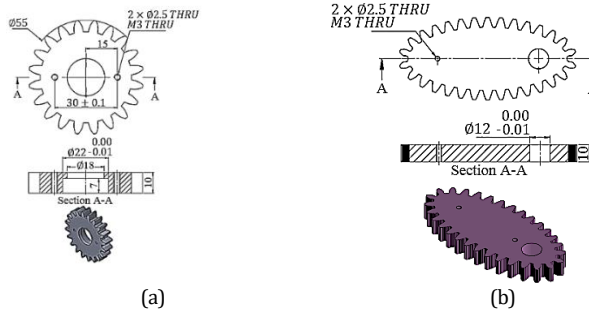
Dimension of the a) spur, and b) elliptical gears.
